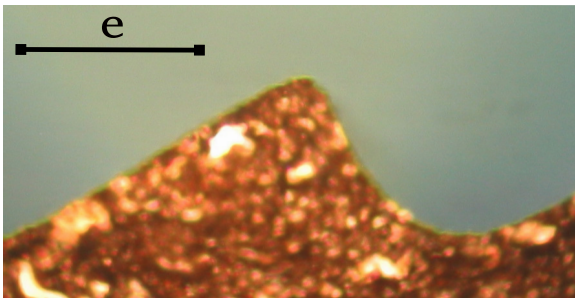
Wire eroded aluminium tooth,  $e = 0.3$  mm
